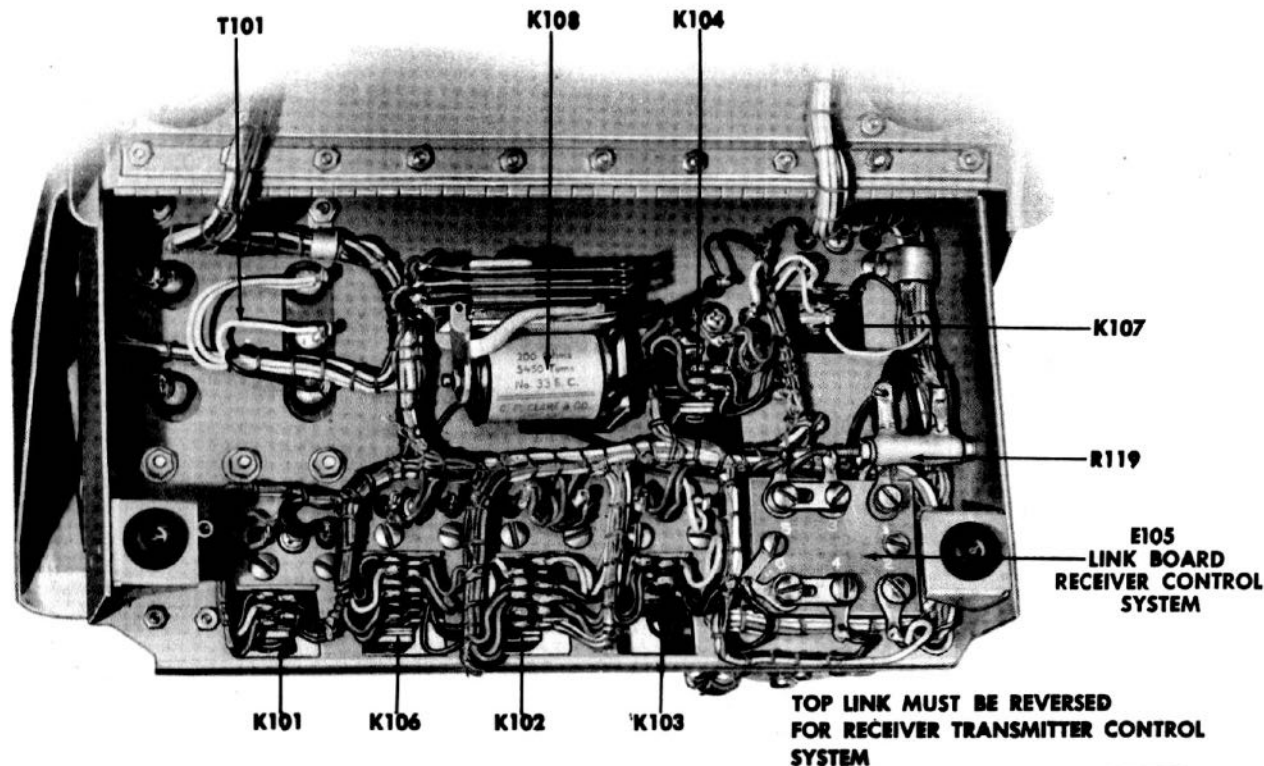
Navy Type CQC-23497 Selector Control Unit—Bottom View of Chassis
